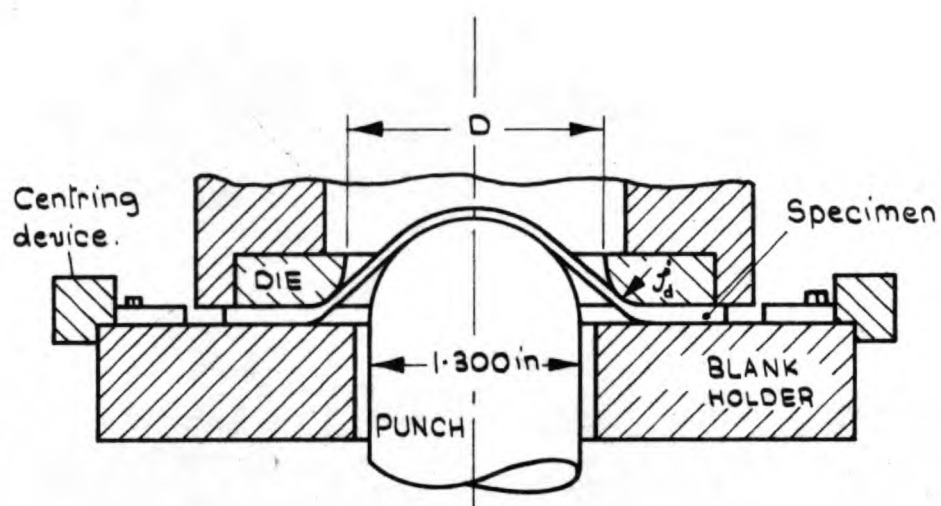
TOOLS FOR THE DEEP-DRAWING TEST.
